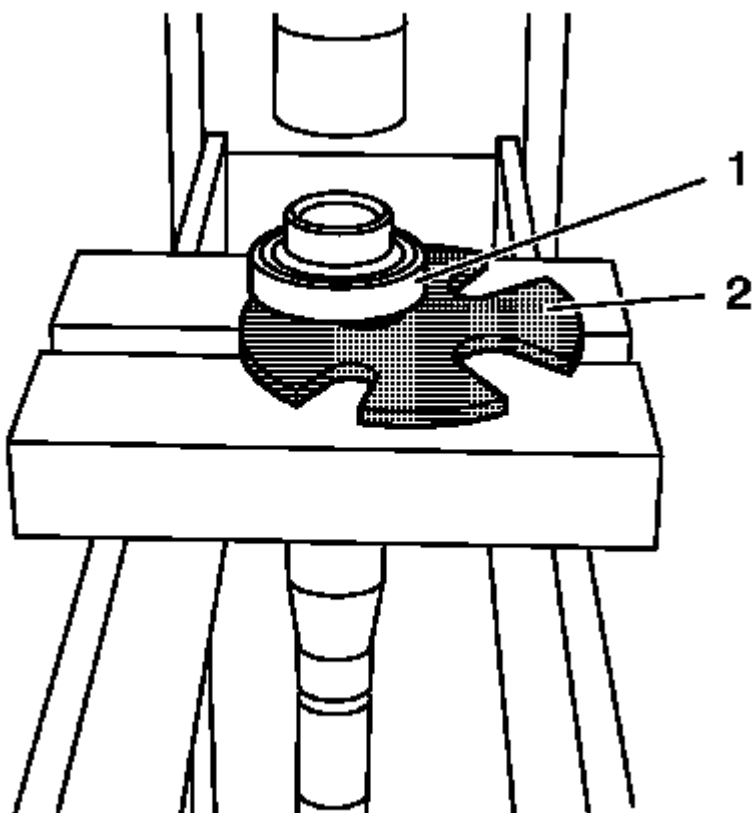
View Of Transfer Case Intermediate Shaft Bearing Removal
